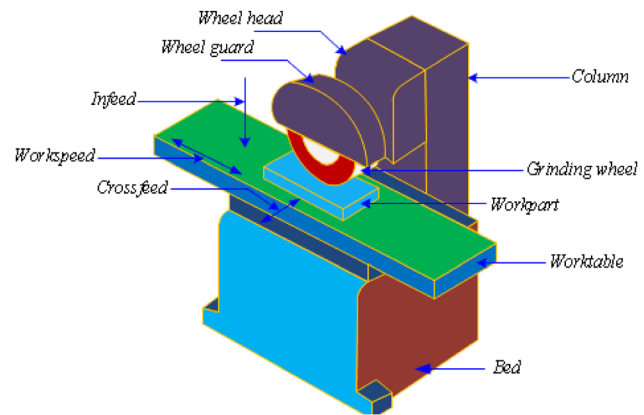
Grinding machine with grinding wheel and cross-feed mechanism.
